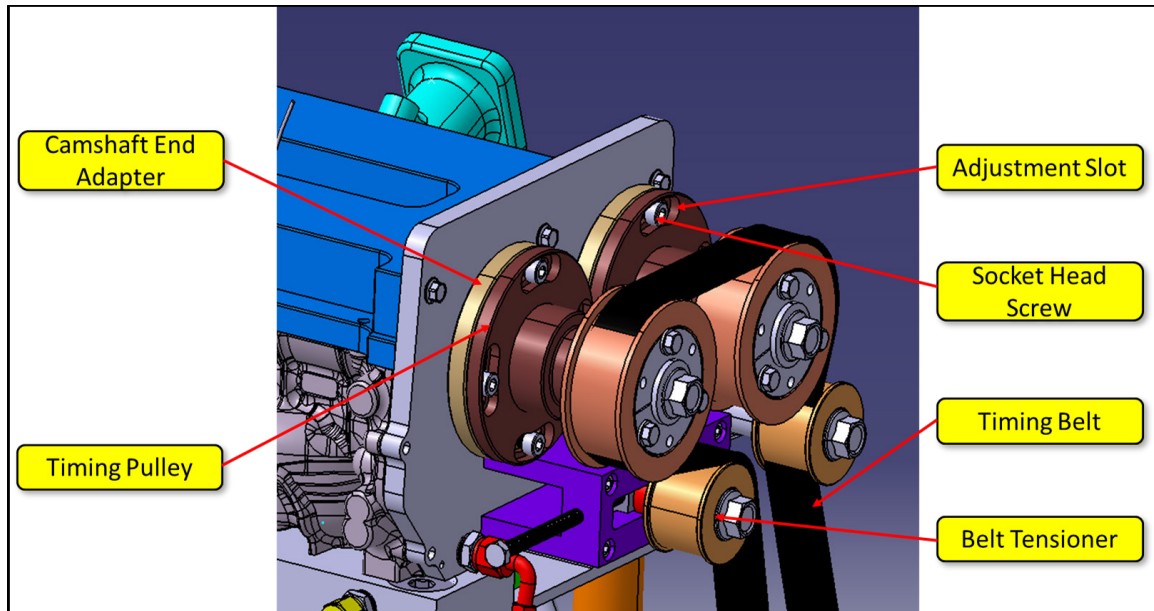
Optical engine camshaft assembly. (Source: Mahle Powertrain)
